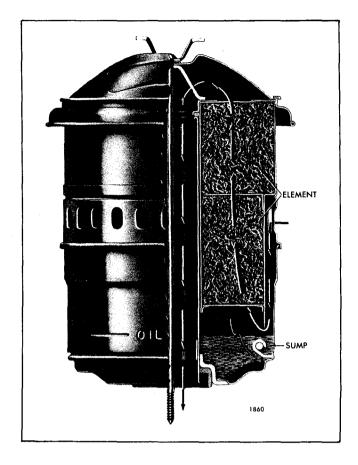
Light Duty Oil Bath Air Cleaner Assembly
